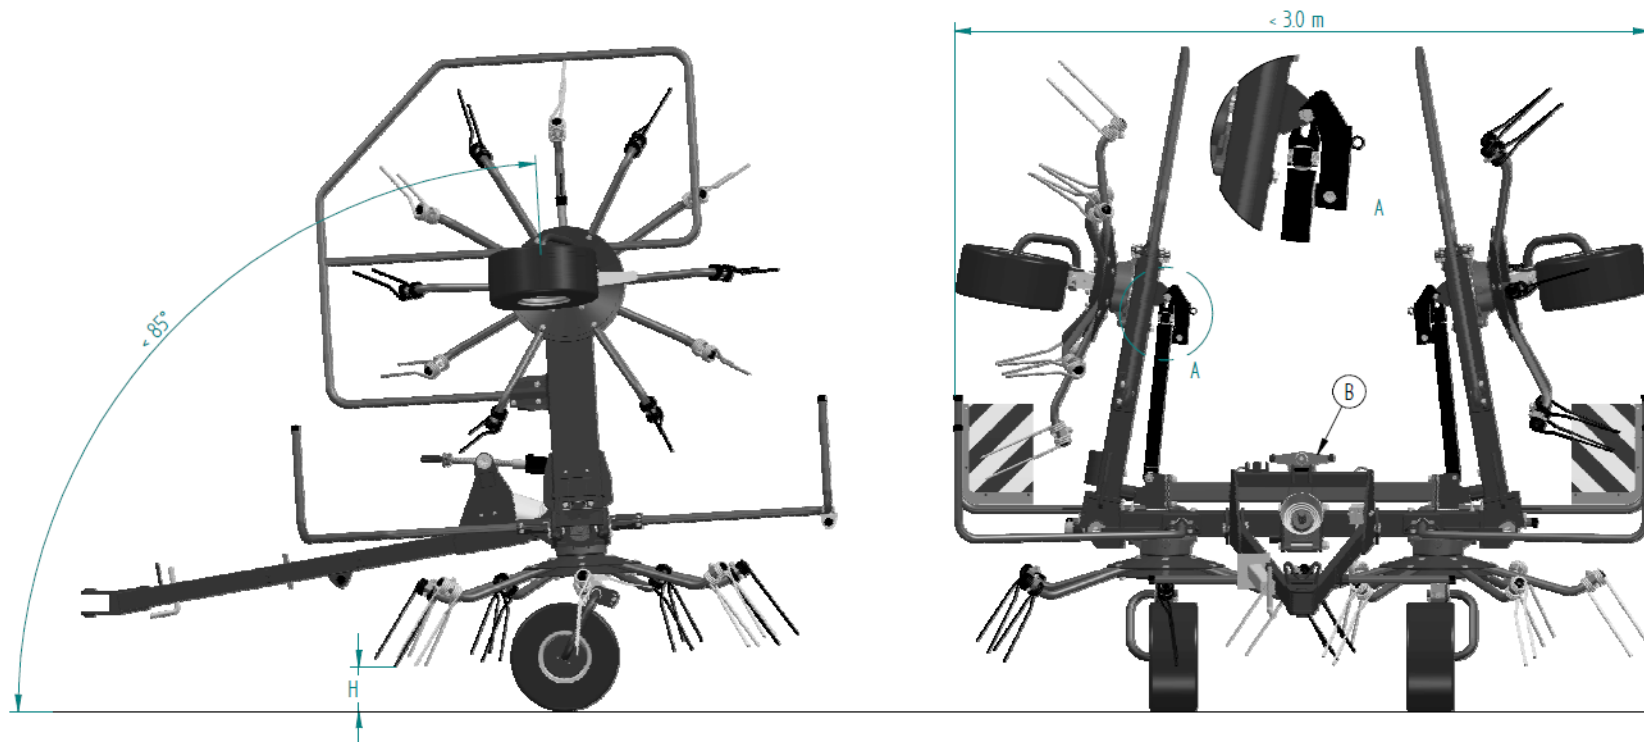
Tedder transport position (trailed version): A - actuator mechanical lock, B - knob
